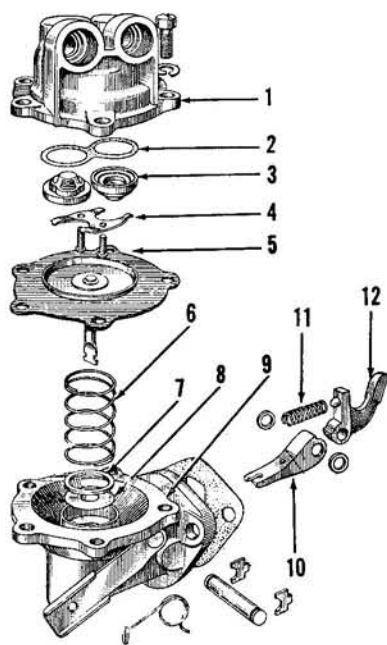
Exploded view of primary fuel pump. Pump is mounted on injection pump and driven by injection pump camshaft.
